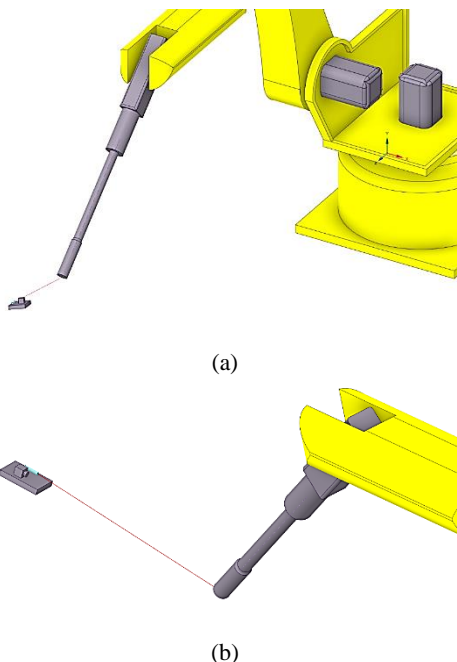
Fixed Camera Approach; (a) 3D schematic of a welding robot. (b) Welding robot viewed from the
